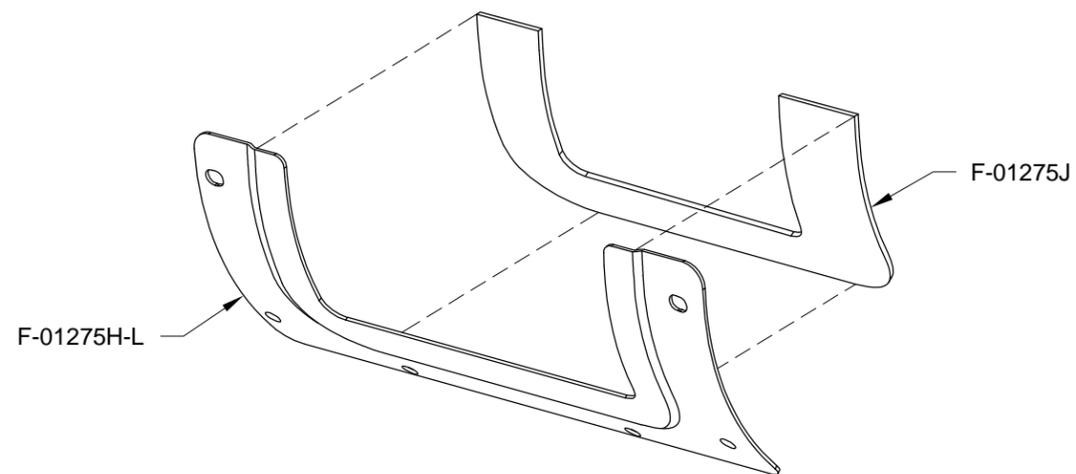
BOTTOM LEFT MAIN GEAR SEAL ASSEMBLY
